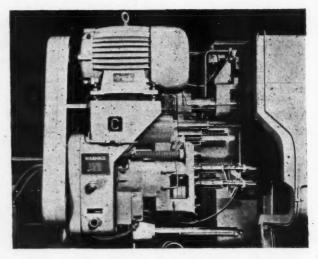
Close-up view of one of the tapping heads on the Cross machine shown in Fig. 1
